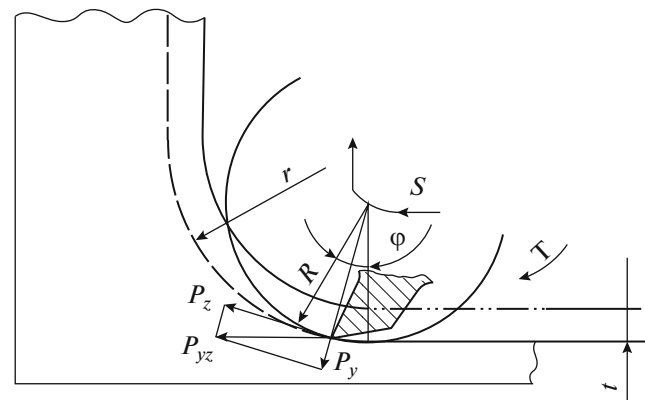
Milling forces when the radius of the end mills is less than the mating radius of the contour surfaces.
